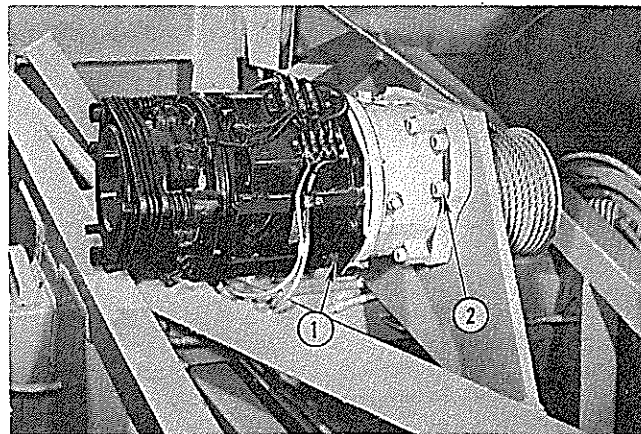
MOTOR AND GEAR BOX MOUNTING
